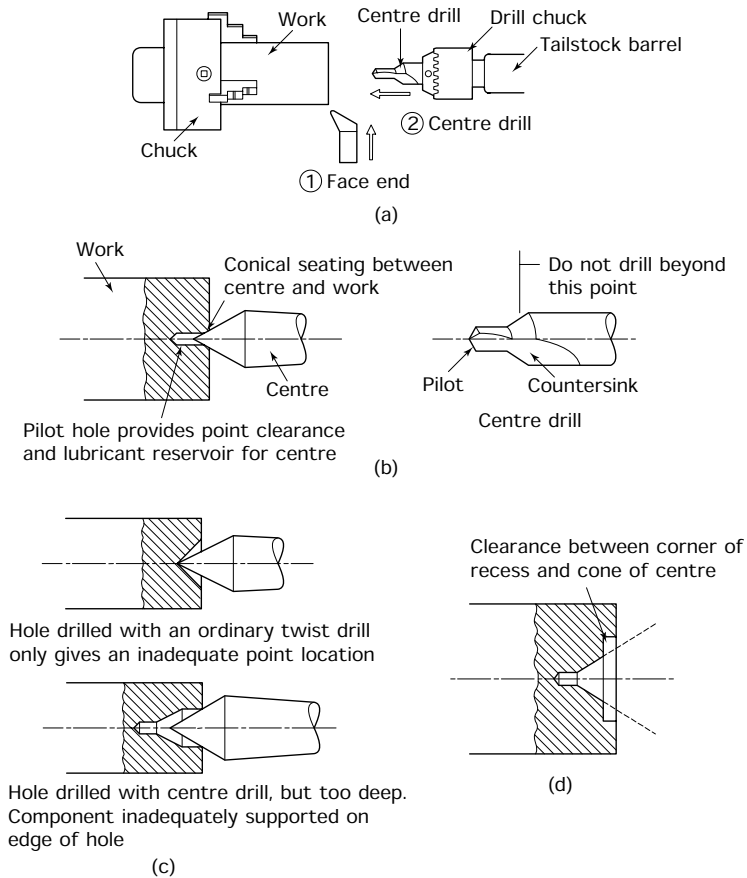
The centre hole: (a) centring workpiece; (b) formation of the centre hole; (c) typical centre hole faults; (d) recessed or protected centre
